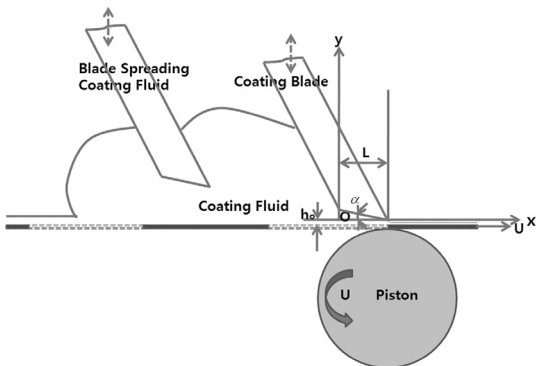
Cross section of a screen printing equipped with blades coating piston skirts
